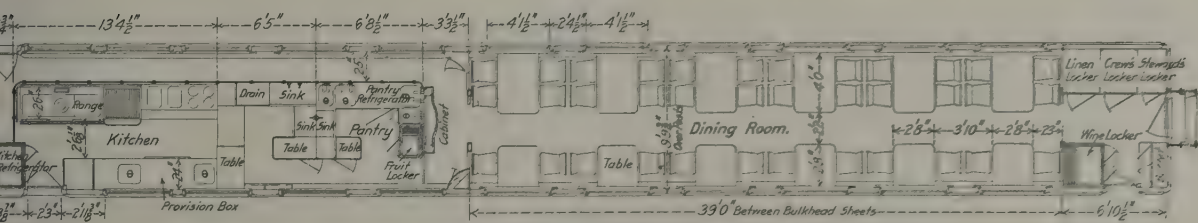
Floor Plan of Pennsylvania Lines Dining Car.
